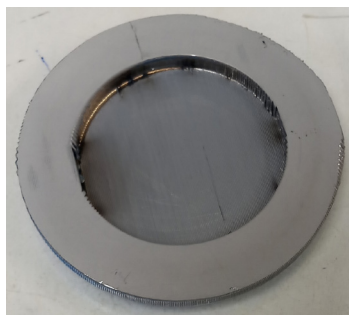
Image of KF-25 3D printed PLA blank flanges at the end of the manufacturing process. The unidirectional technique was used followed by surface polishing and aluminium coating.
